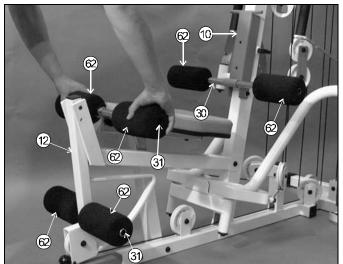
Next, attach one Foam Foot Roll 7 X 4 X 1 (#62) to each end of the three tubes as shown above. Refer to the Exploded View Diagram on page 26 for further clarification of this assembly.
